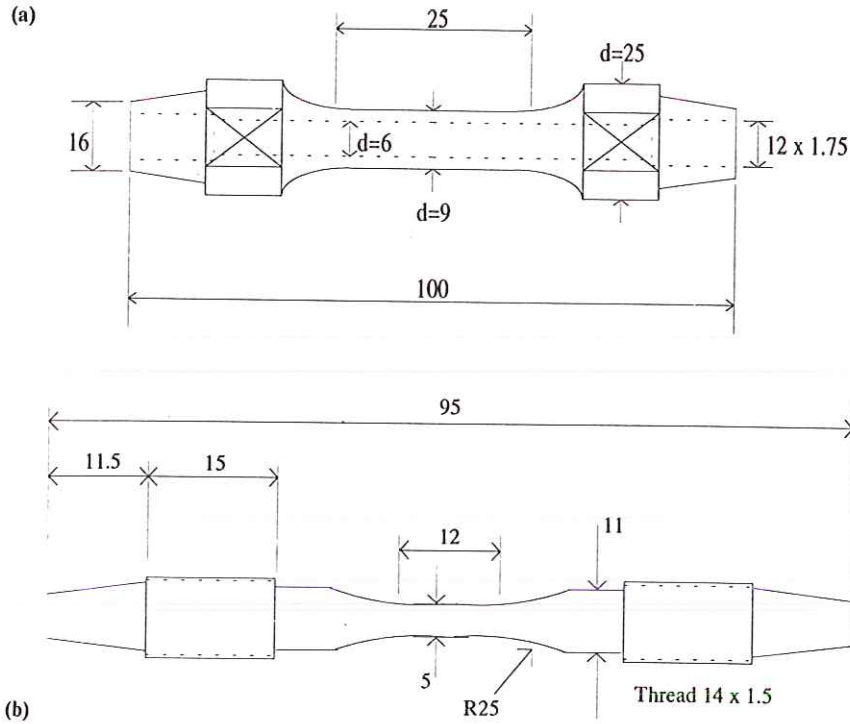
(a) tubular torsion test piece; (b) solid tensile specimen.
